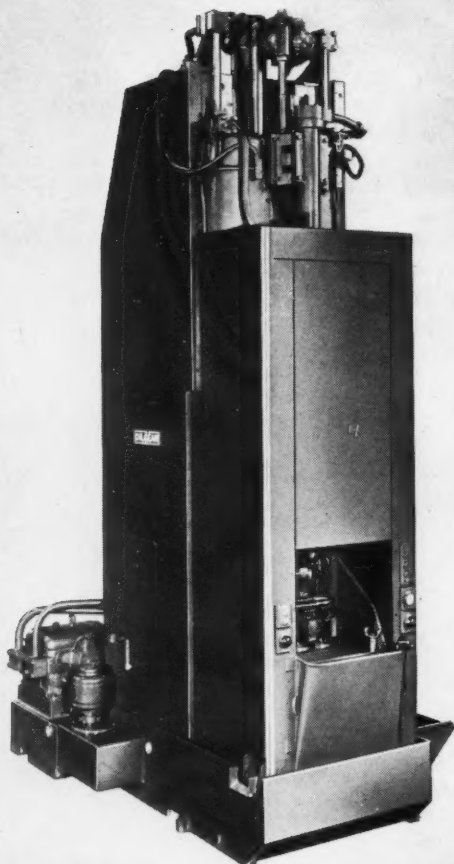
30- by 54-inch Vertical Cyclematic Broaching Machine Built by the Oilgear Co.
